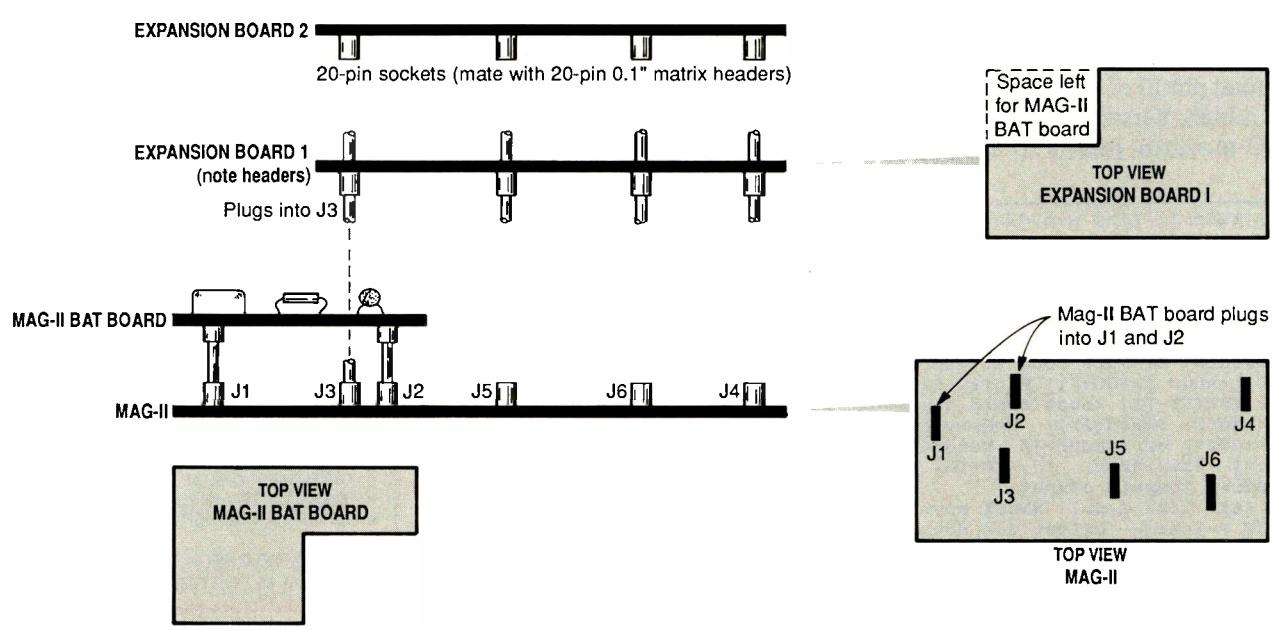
Optional accessory boards plug into the MAG-11 SBC main board via single-row jack/plug arrangements.
